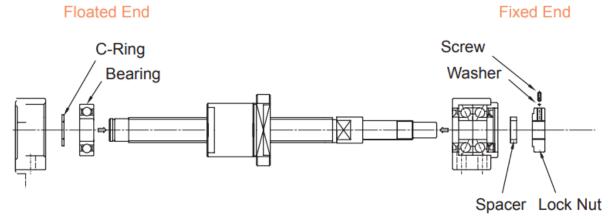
Mounting Ball Screw to End Mounts which then are Mounted onto the Linear Guide Rail which sits on top of the T-slot Frame [27]
